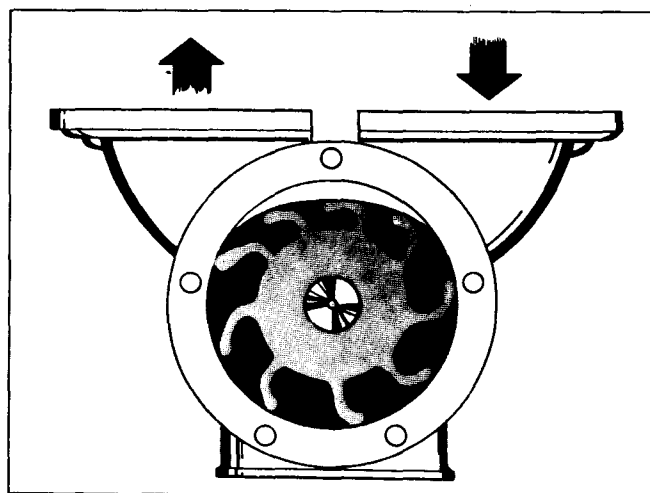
, (N20810). Impeller installed for right hand rotation
